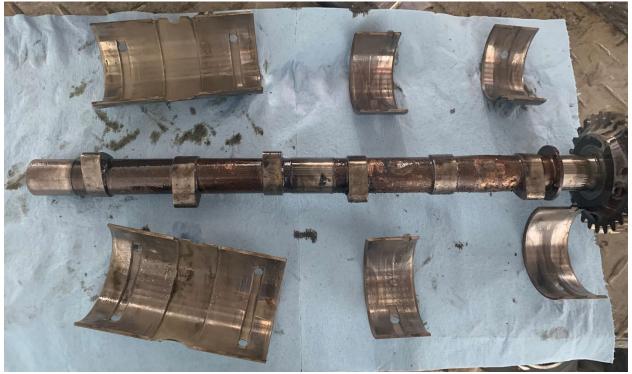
View of camshaft and main journal bearings. From left to right - front main bearing, center main bearing, rear main bearing.
